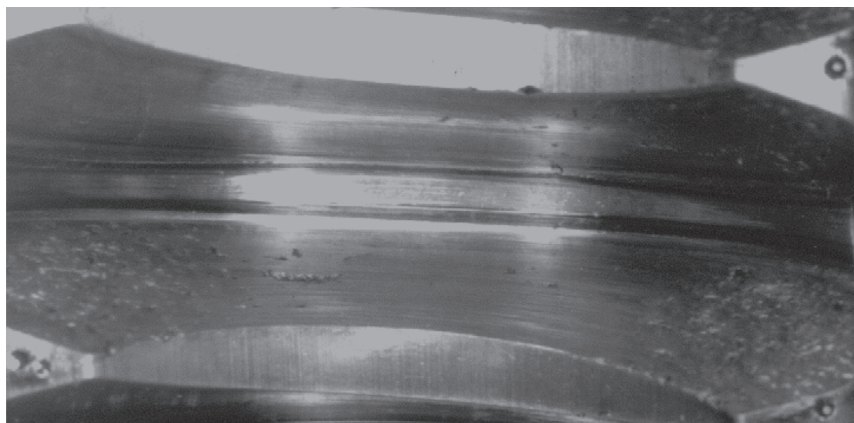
Same flank as in [Figure 3](#), after macropitting has been removed
